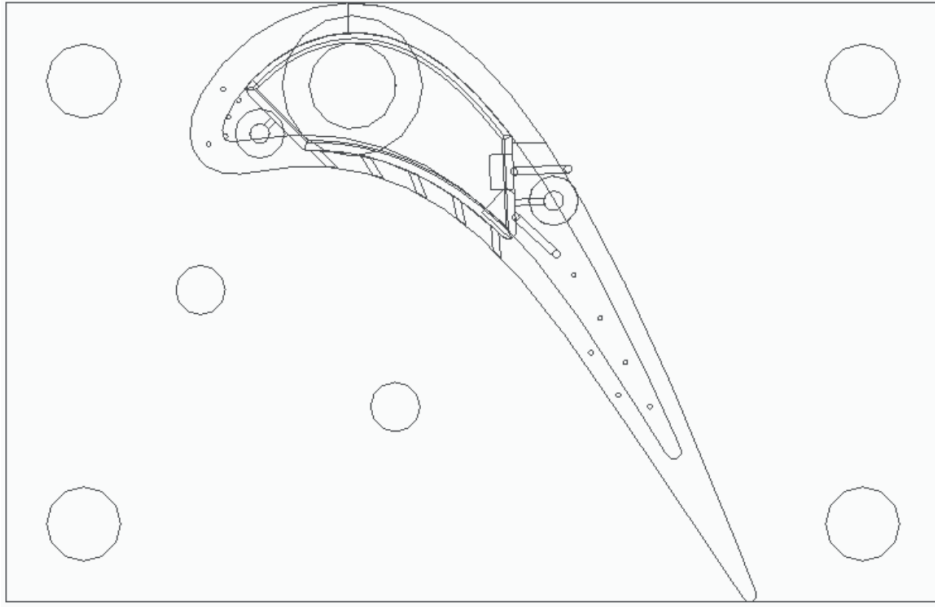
Transparent top view of the pressure side film cooled turbine blade model with the B1 film cooling configuration.
